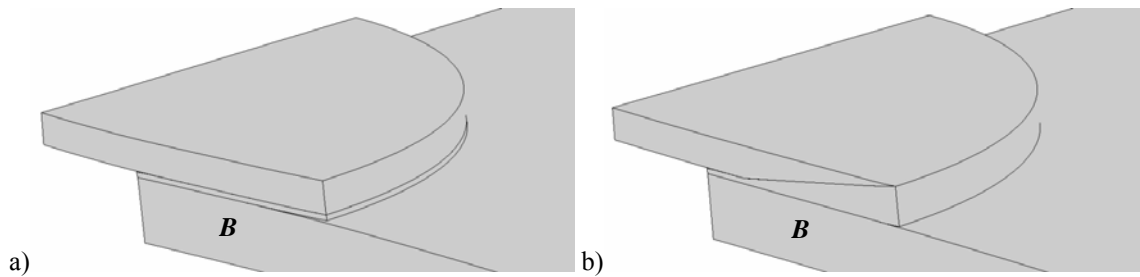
Deformed shape of the standard (a) and 1.2 mm patch inner chamfer (b) repairs (tensile load).
